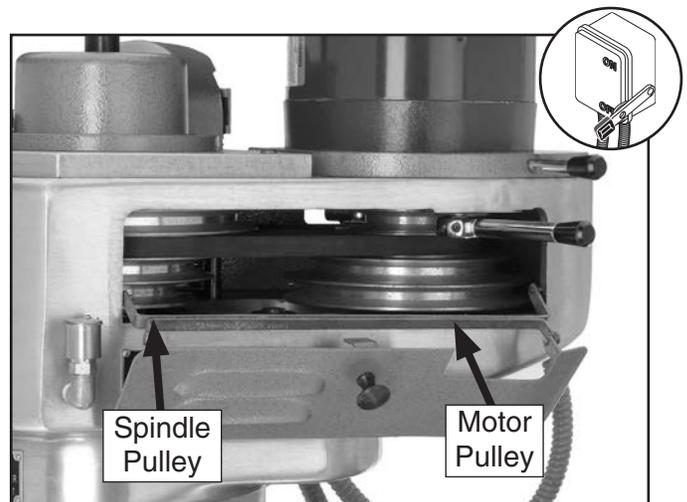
Model G9901/G9902 side belt cover removed (right side shown).
